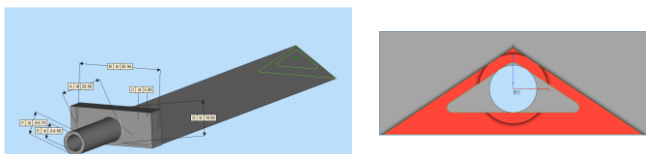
Test Specimens No.2 (Triangular cross-section)
